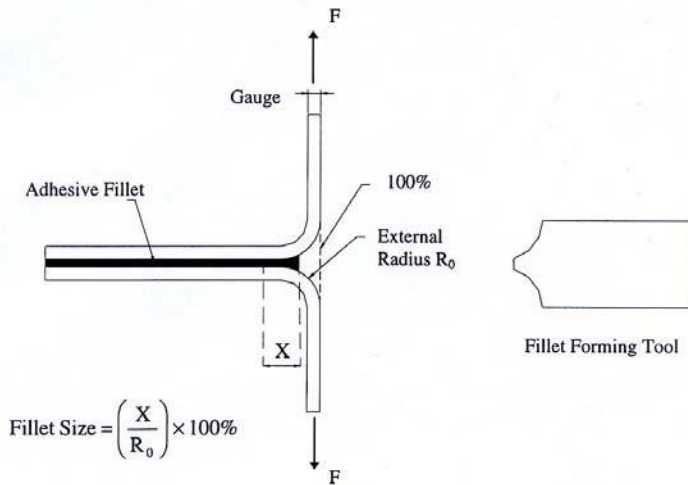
Definition of fillet size in T-peel joint (including fillet forming tool) [35]
